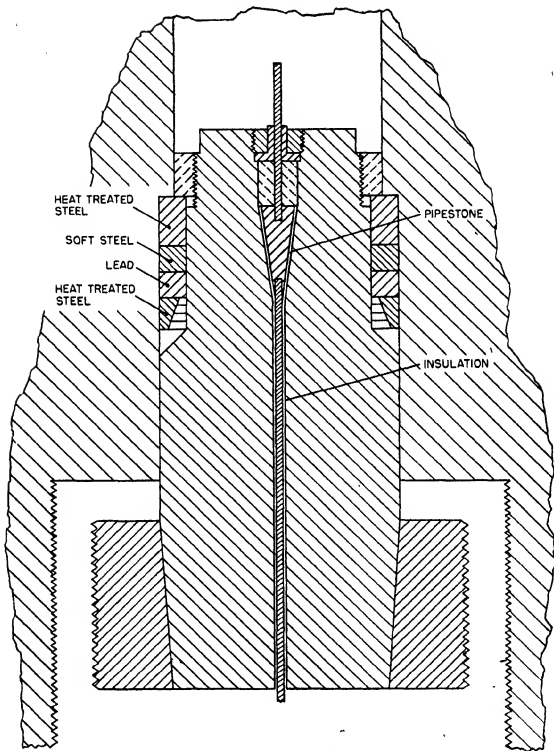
Improved design for getting electrical leads into the pressure cylinder, together with the improved split ring packing
